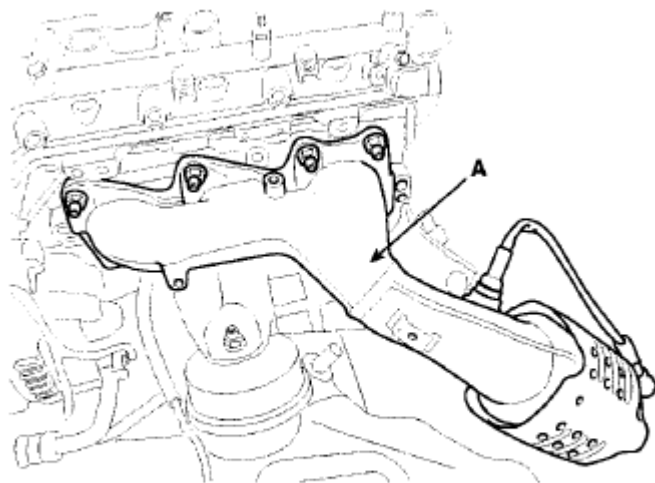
Identifying LH Exhaust Manifold Heat Protector (A)
